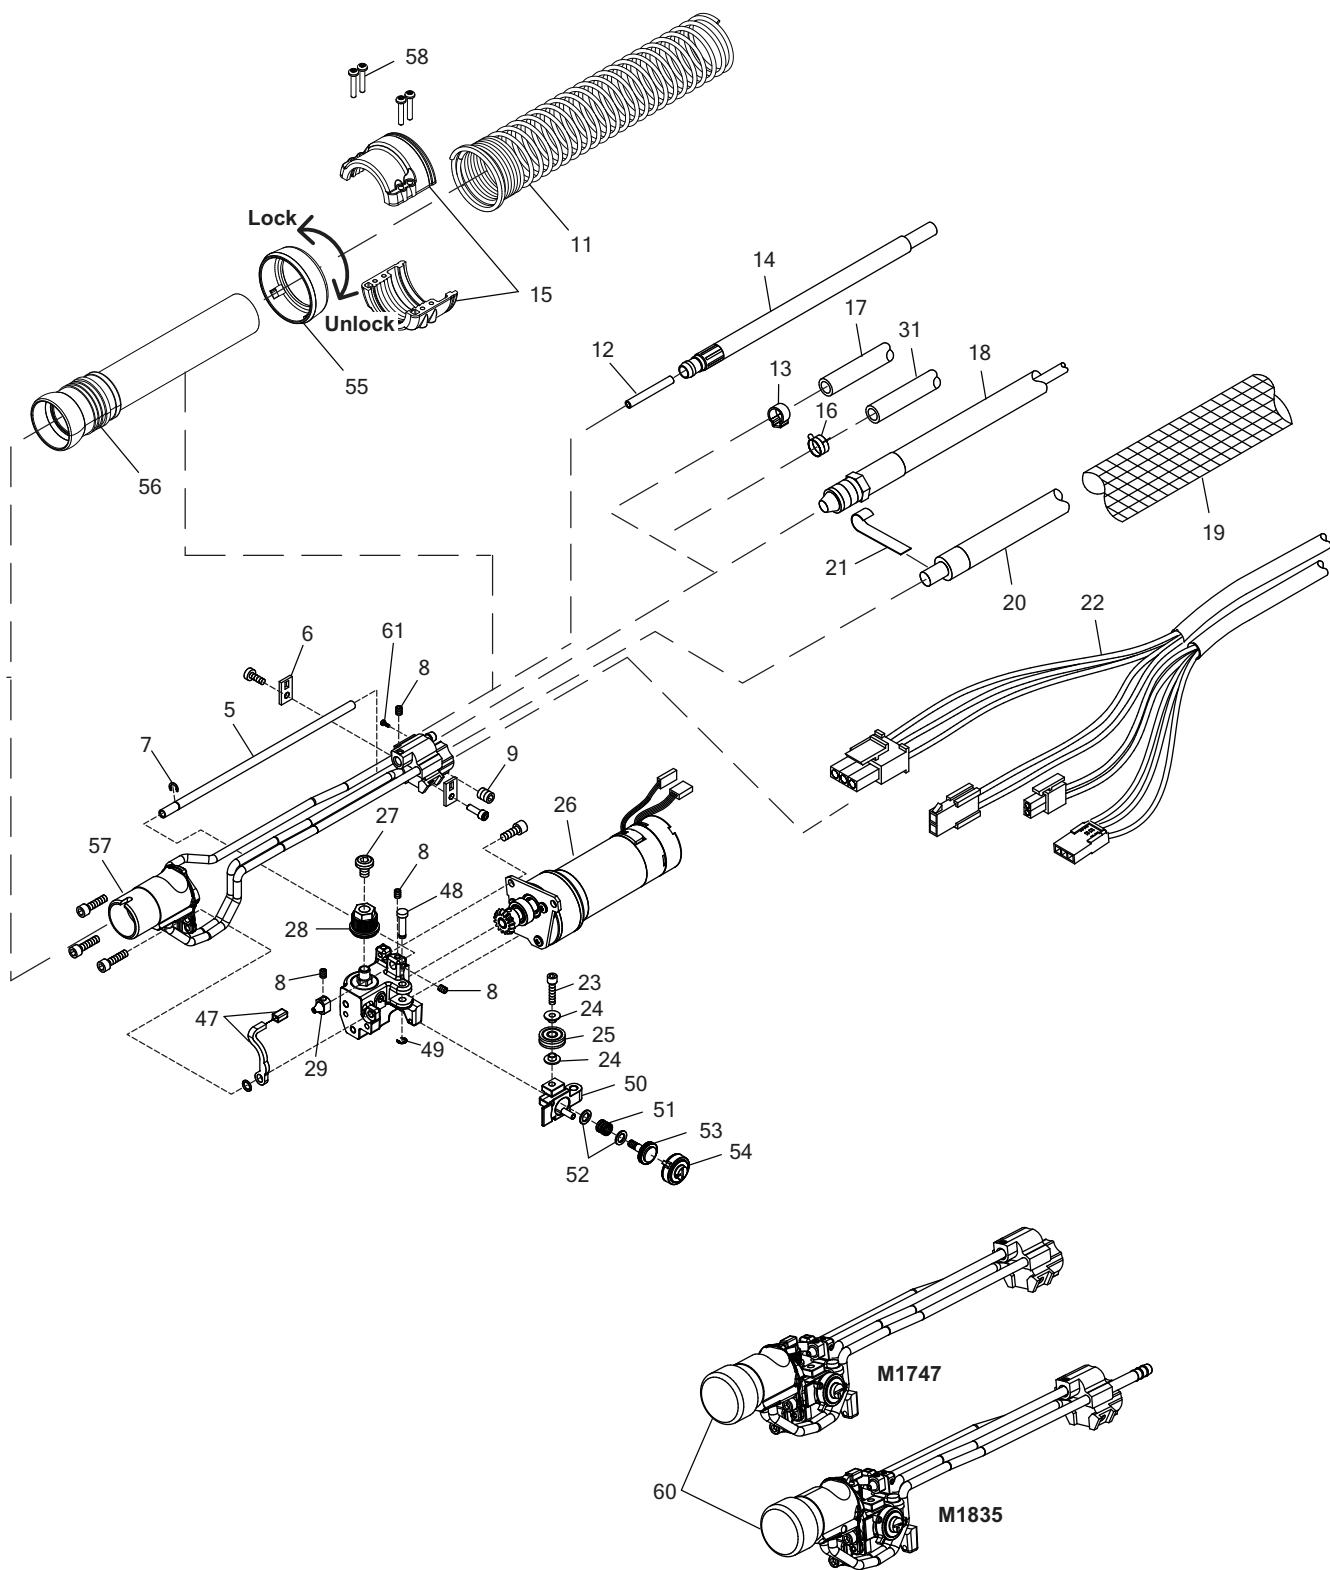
Exploded View Of XR-Aluma-Pro CB Gun
